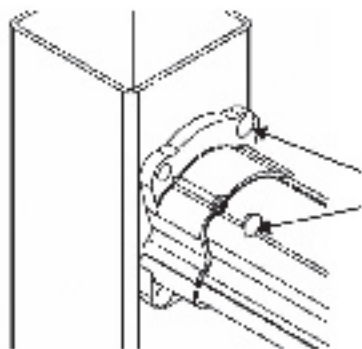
Installation of Top Bracket and Screw Hole Covers.
